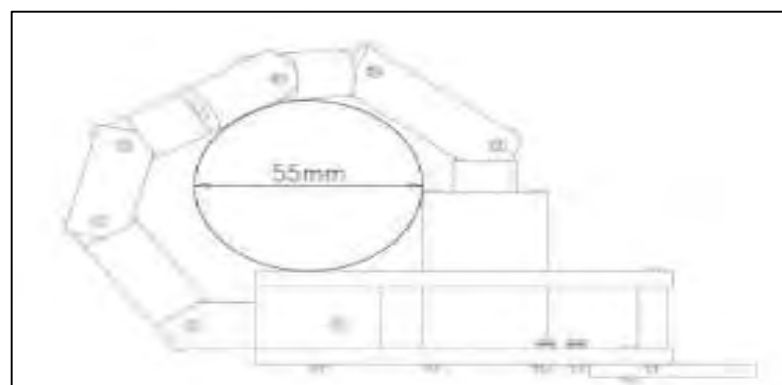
CAD drawing of the first prototype grasping cylinder with 3-segment of thumb [3]
